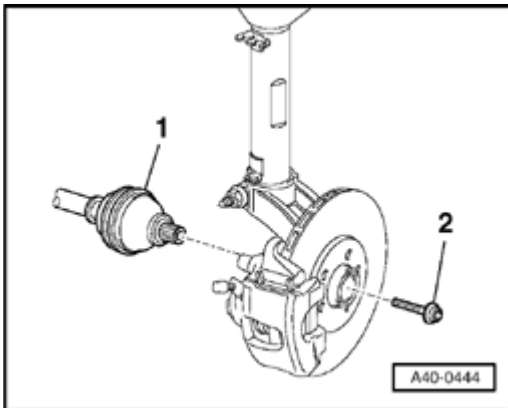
Removing Collar Bolt At Left/Right Drive Axles
